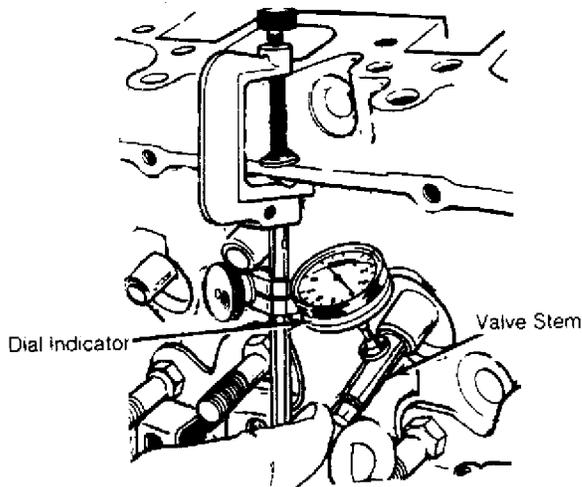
Measuring Valve Stem-to-Guide Clearance - Typical
